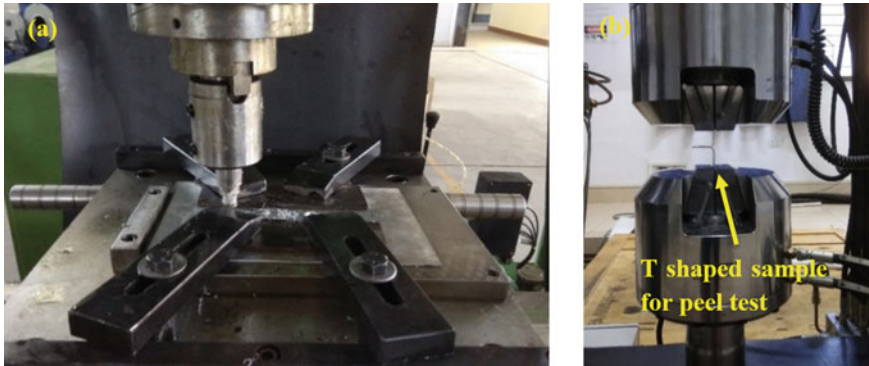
Experimental details: a FSW machine with integrated force and torque sensors, b peel test samples tested in UTM at room temperature
